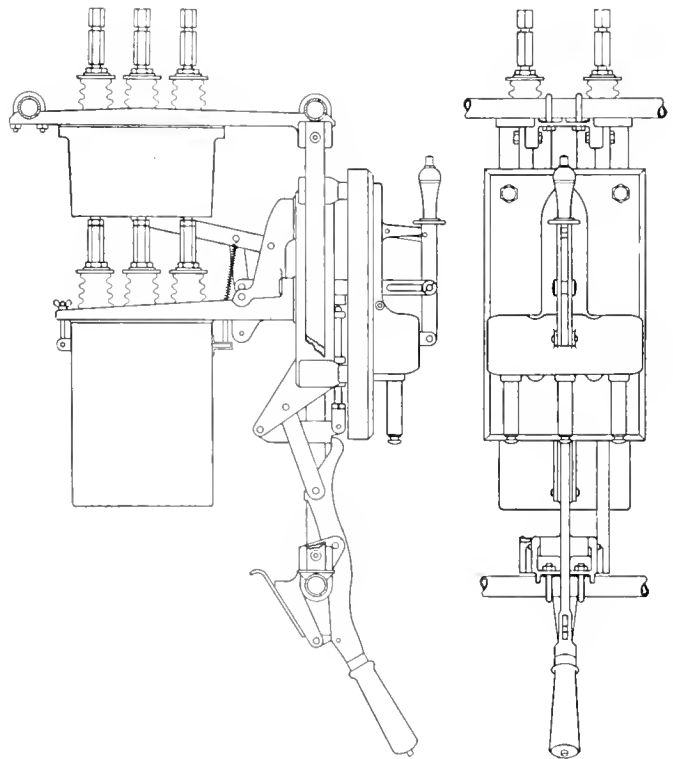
Arrangement of Oil Switches Showing Insulation of Live Parts
